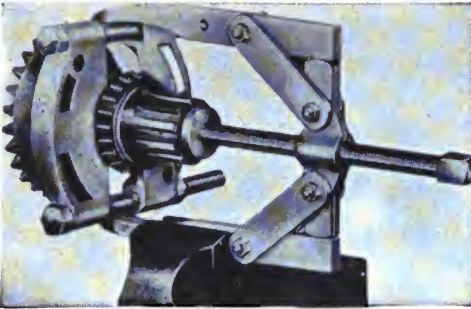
Where there is enough space behind a bearing or bearing ring to admit a puller, always be sure that the puller is adjusted so that it will not slip over the inner ring when pulling pressure is applied. If this happens, bearing parts can be severely damaged.
